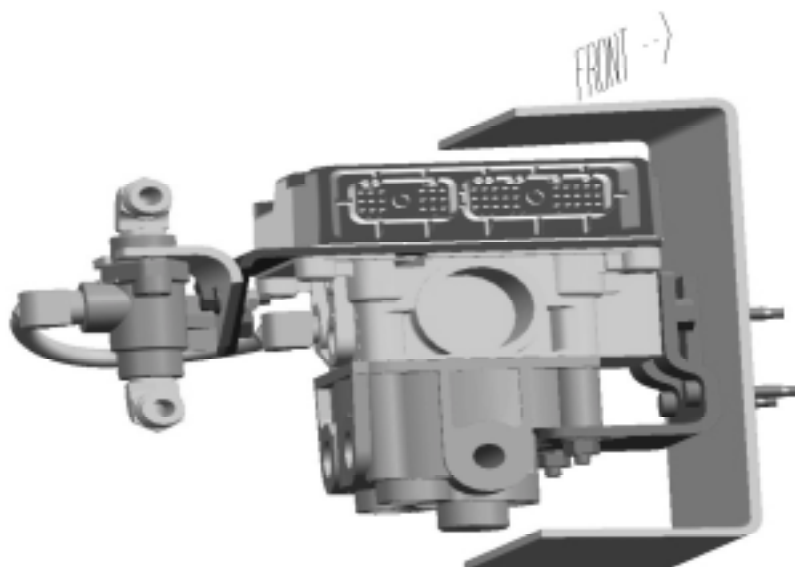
View of Assembly with Bracket Kit Installed (8900083R91)
